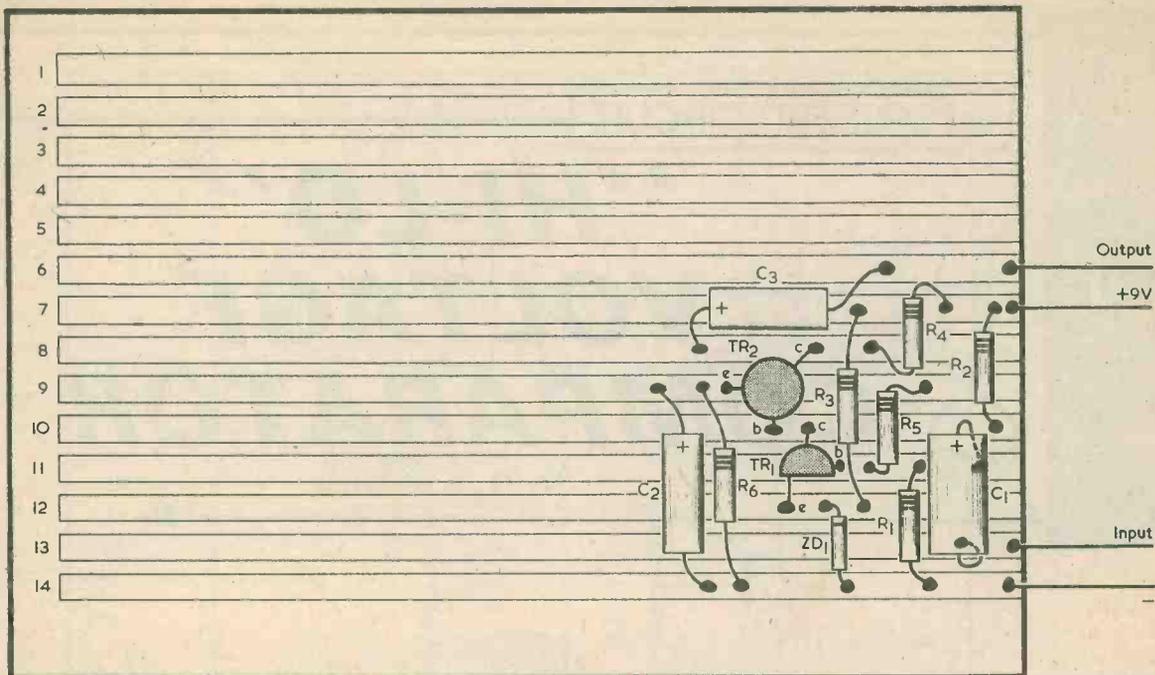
The final assembly of components on the board. Note how compact the Blob Board layout is, whilst still being capable of easy checking
